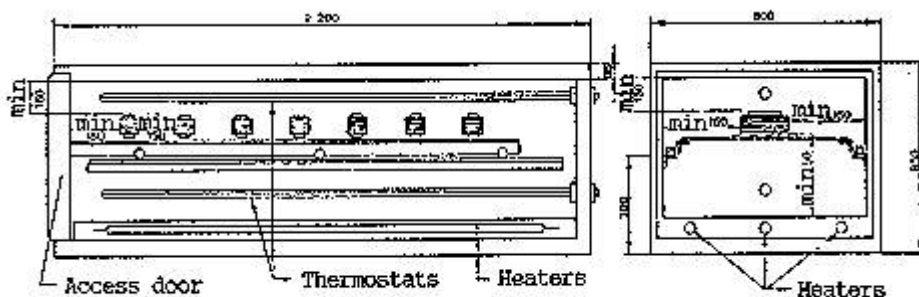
Dimensions and layout of typical heating cabinet (clause 6.7)
